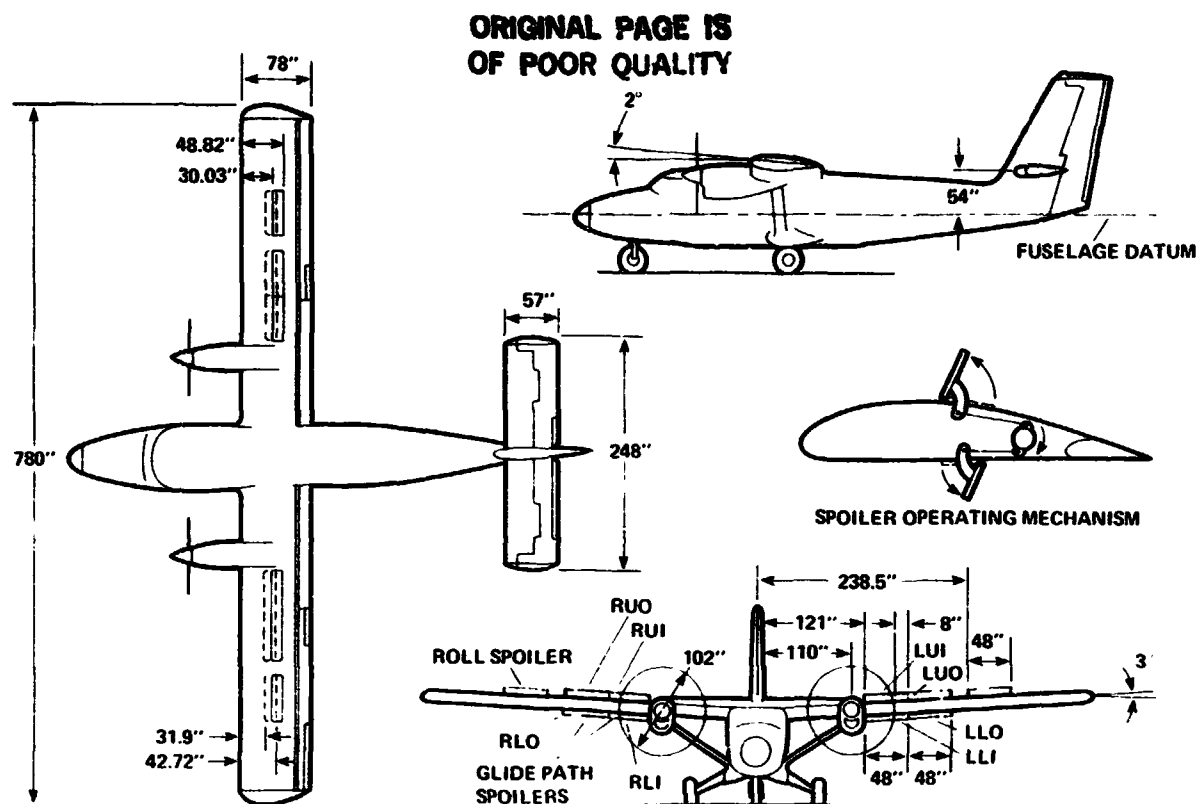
Three view drawing of DHC-6 Twin Otter with wing spoiler modification.
